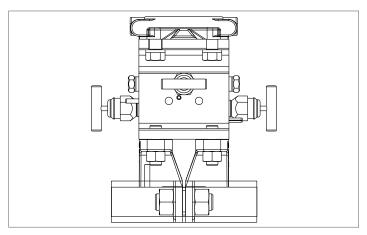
TEK-DP 1610D with 3-Valve Manifold Top View
